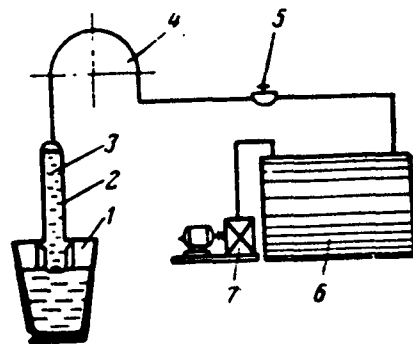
Principal scheme of vacuum-suction casting. 1. crucible 2. mold 3. liquid alloy 4. rubber hoses 5. vacuum depth regulator 6. vacuum cylinder 7. vacuum pump.
